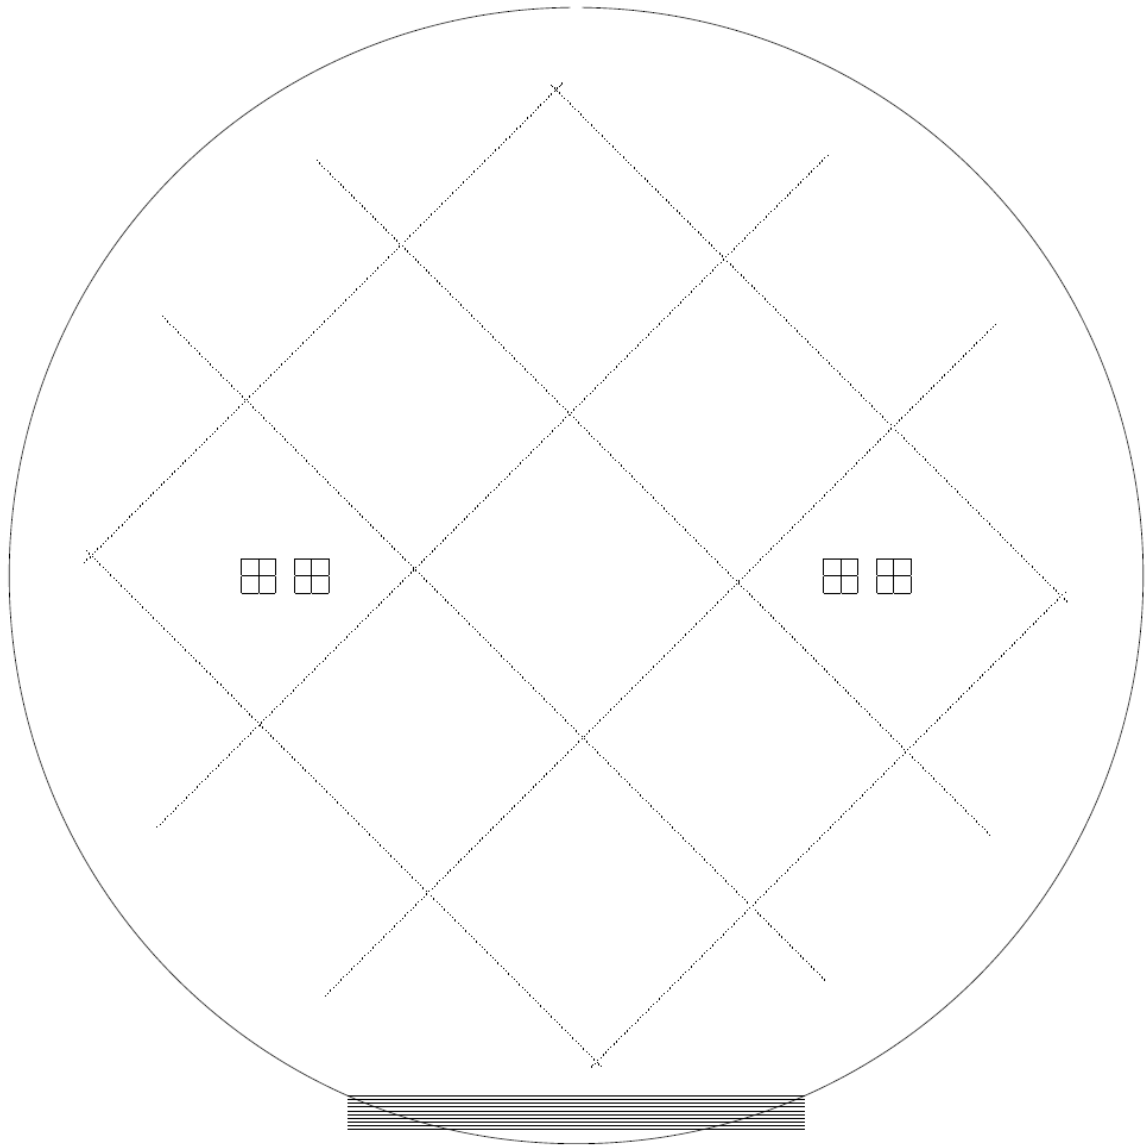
Four-wafer stacked combustors backside mask "A".
